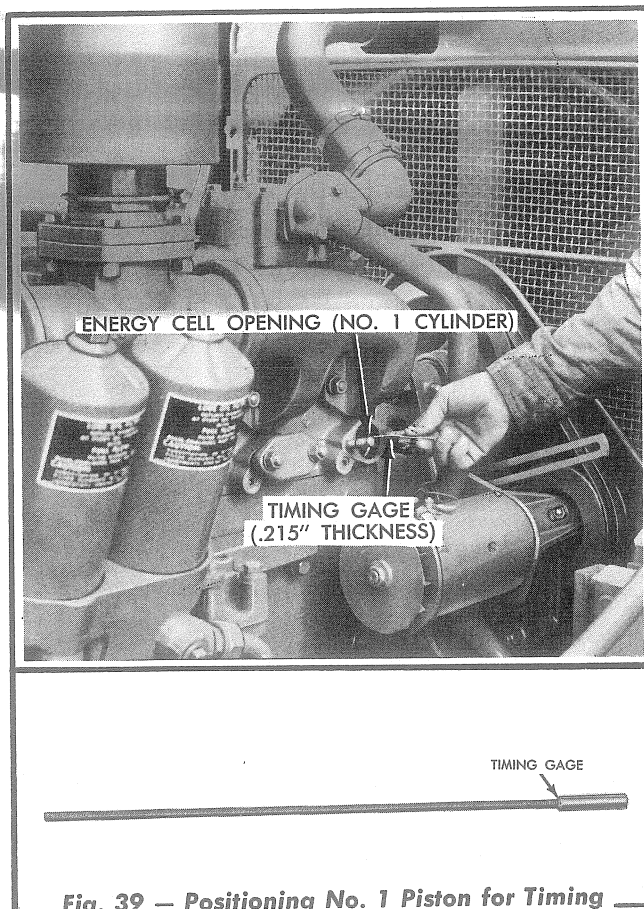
Positioning No. 1 Piston for Timing Fuel Injection Pump to Engine (Tractors Prior to Serial No. 4001)
